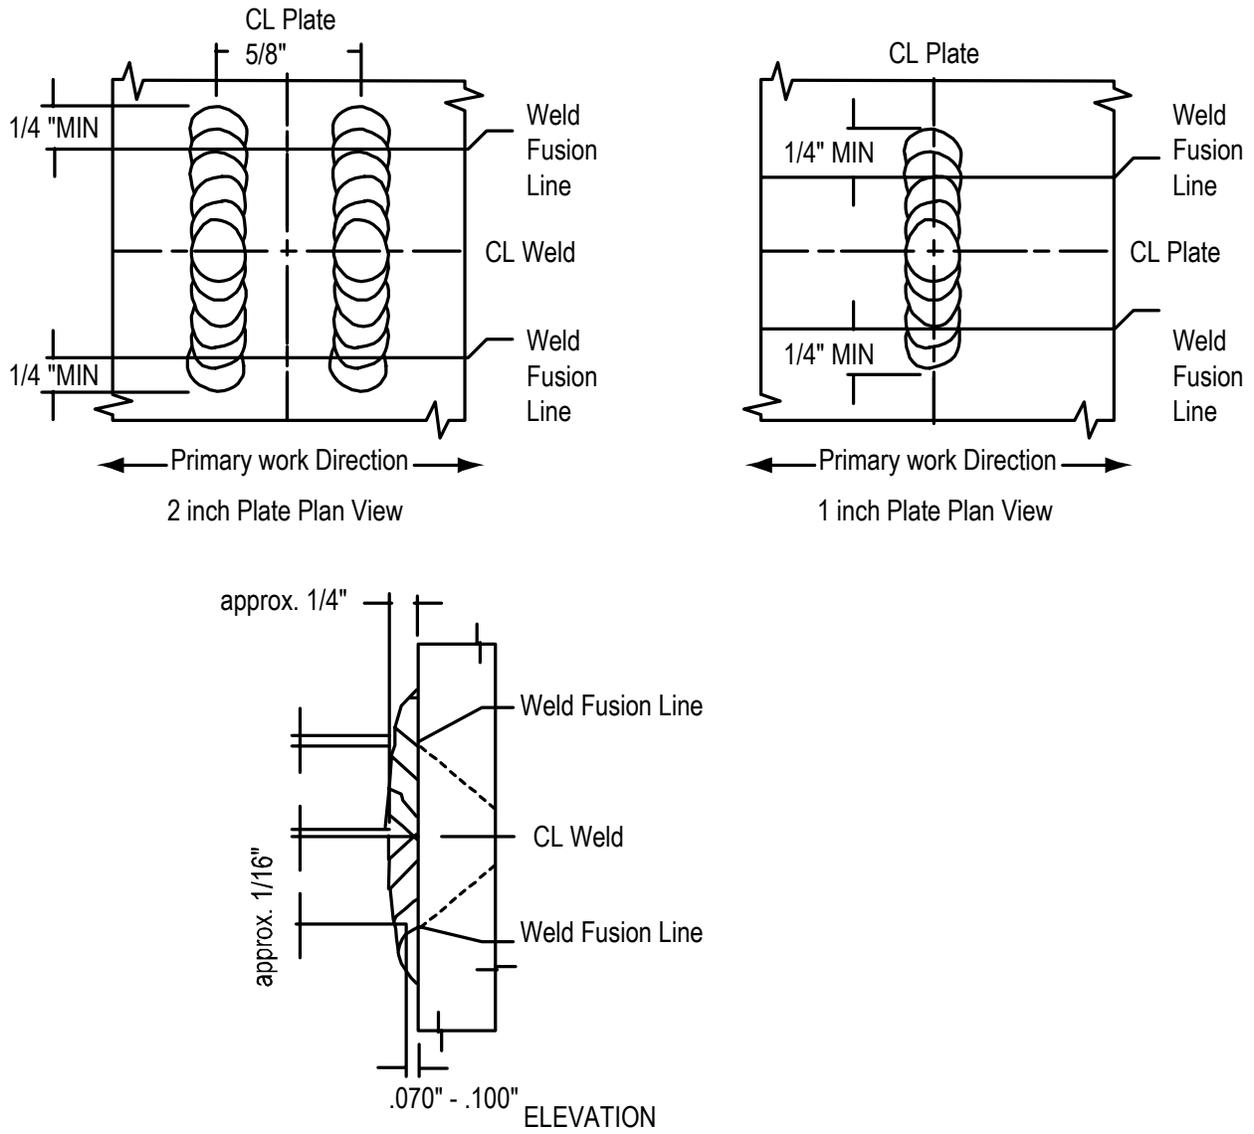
Crack starter bead configuration - weld metal and weld procedure evaluation
